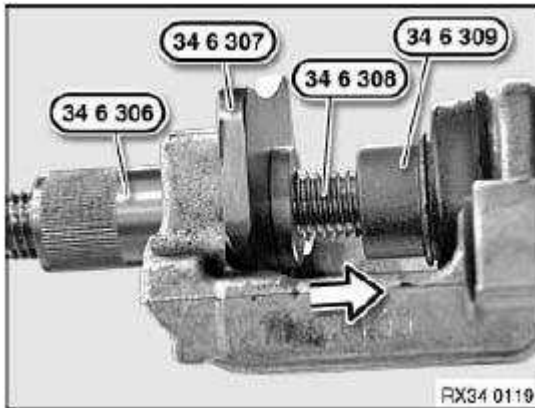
Identifying Special Tools (34 6 309, 34 6 306, 34 6 307 And 34 6 308)
